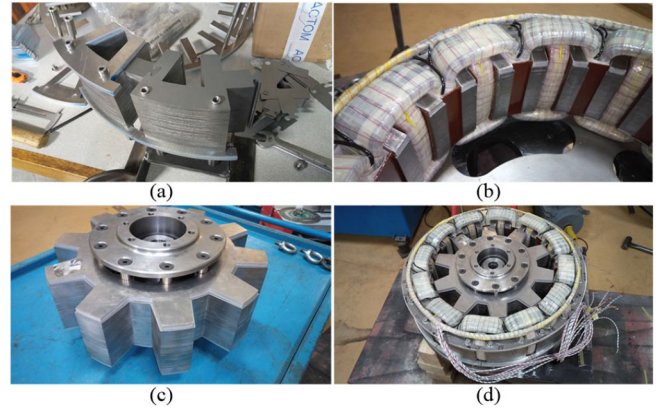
Manufacturing and assembling: (a) stacking of stator laminations, (b) assembled coils, (c) assembled rotor, and (d) WF-FSM prototype.
